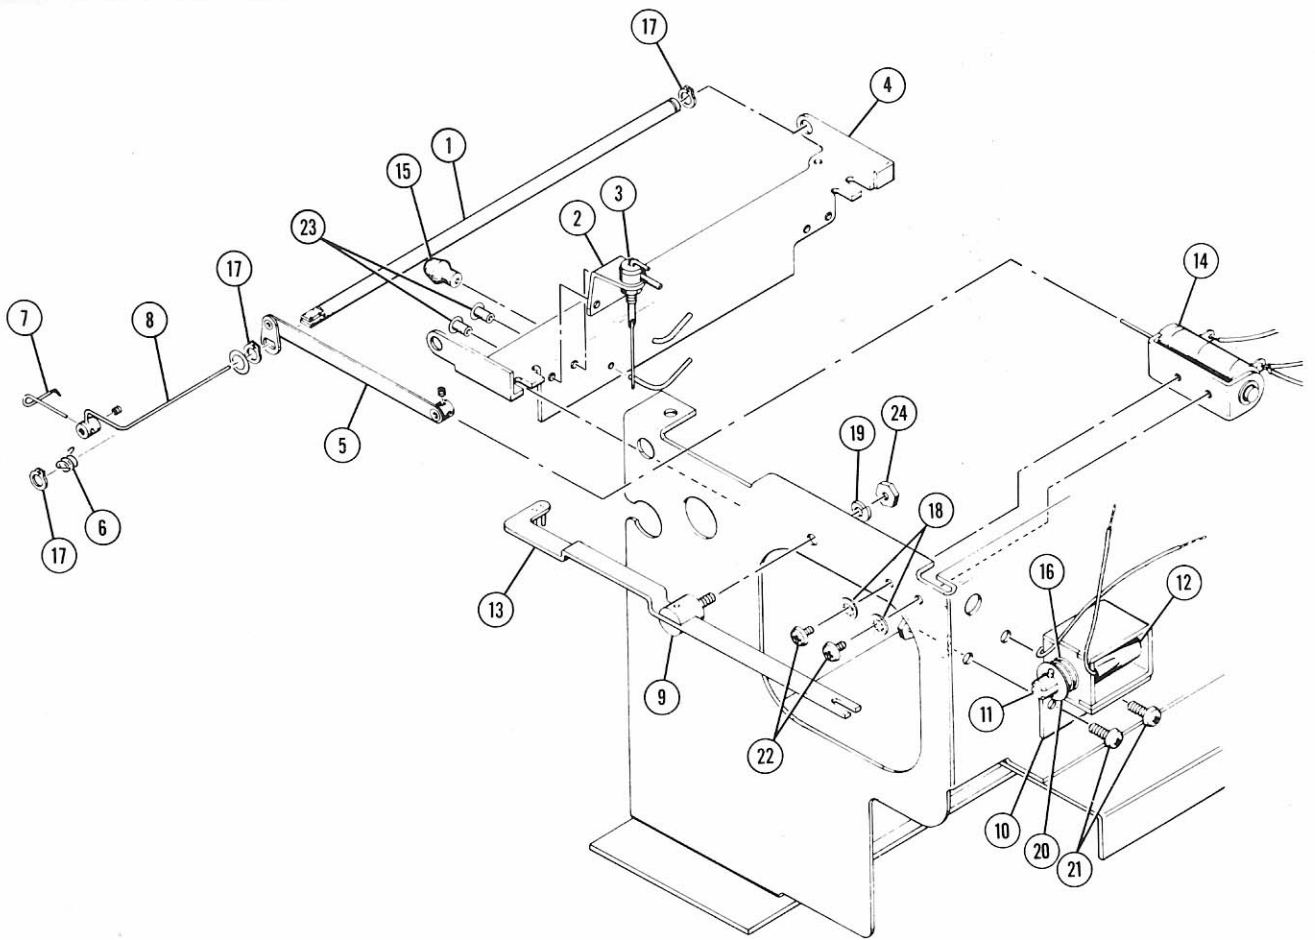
EXPLODED VIEW OF GEAR ASSEMBLY (P/N A10083) (Sheet 1 of 2)
